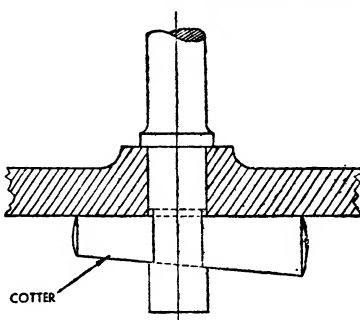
Machine parts are often secured by a cotter tapered as shown.
